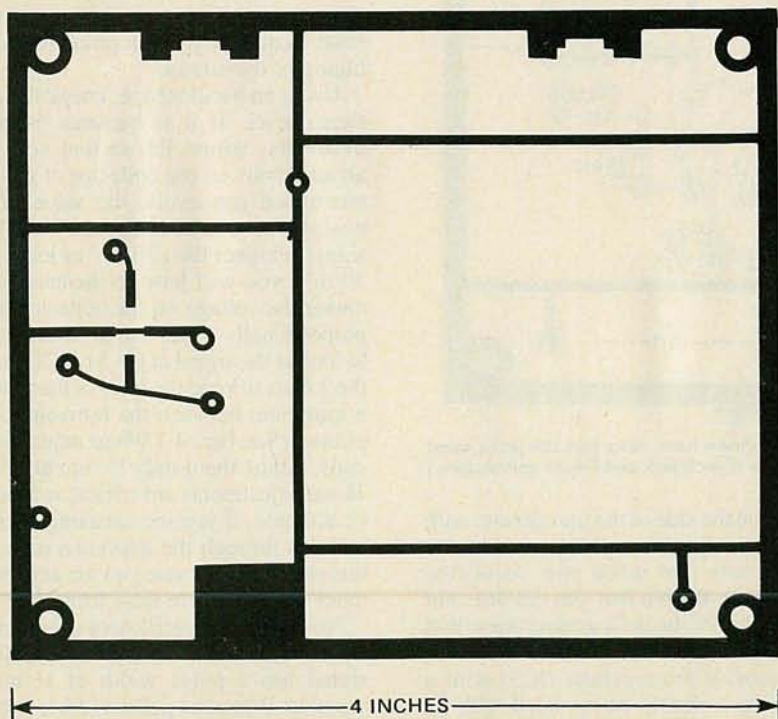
THE COMPONENT SIDE of the decoder board. Note that there are only 7 connections to be made on this side of the double-sided board, so plated-through holes are not necessary.
